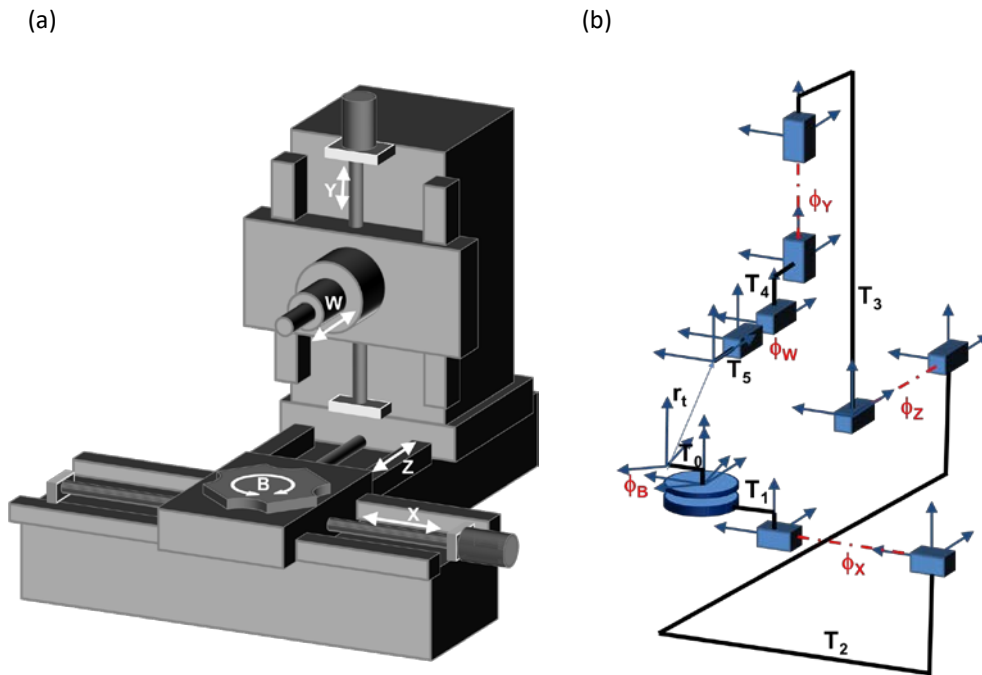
(a) Schematic of a 5-axis machine; (b) kinematic model showing the shape and joint transformation
